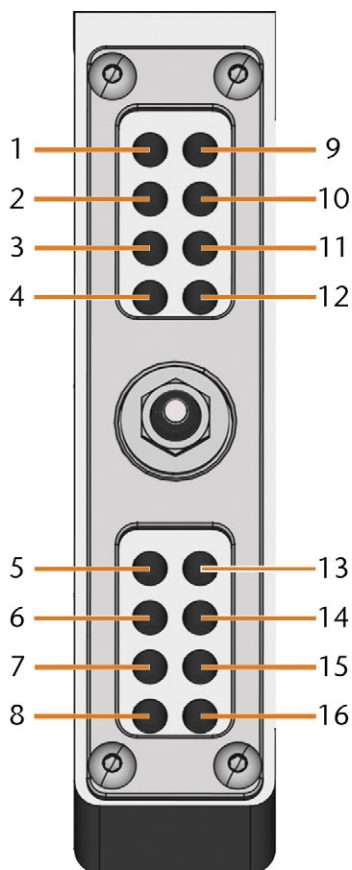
INSERTING TOOLS INTO THE TOOL POSITIONS
